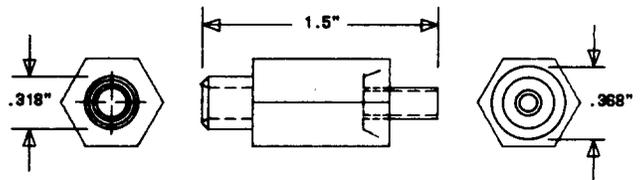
KS-21873, L2, Inserting Guide Bushing Tool
